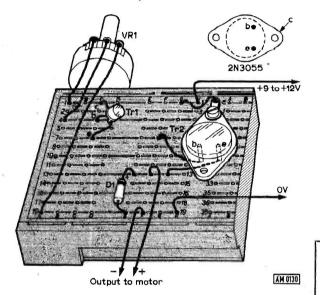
Layout for Fig. 38. The short leads on Tr2 should be extended to connect to the T-Dec and the collector connection made via a solder tag bolted to Tr2.
